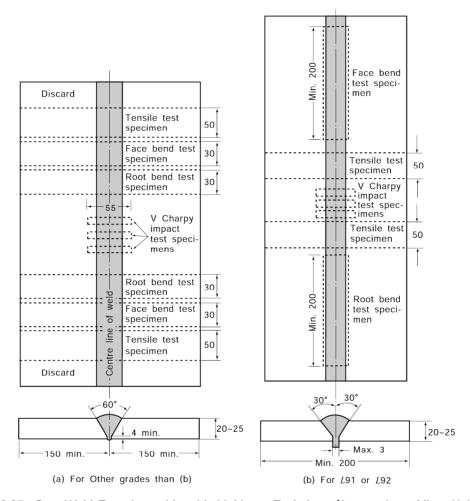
Butt Weld Test Assembly with Multi-run Technique (Automatic welding, Unit: mm)
